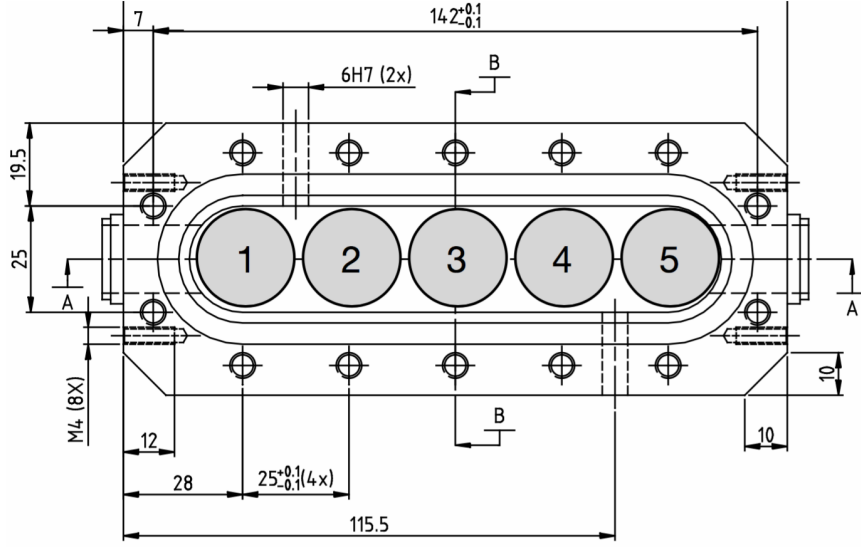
Technical drawing of the SWPCs, assembled for the experimental set-up at GIF++. Five different positions along the wire length, where the radioactive source may be placed, are shown: position 1 is close to the HV module. The total dimensions of the detector are: 20 cm x 6.5 x 5 cm.
